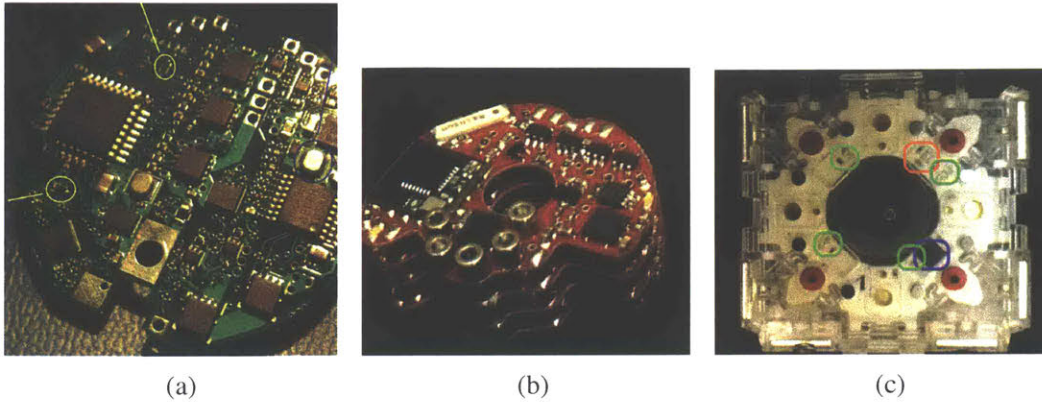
(a) Actual circuit board kyle built (b) controller circuit board (c) face circuit boards
